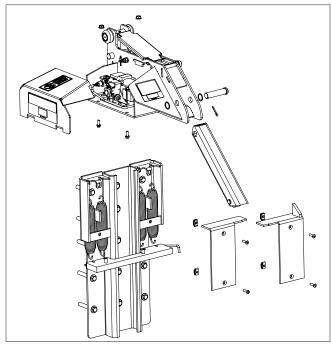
FIGURE E—INSTALLING CARRIAGE ASSEMBLY INTO ROLLER TRACK
